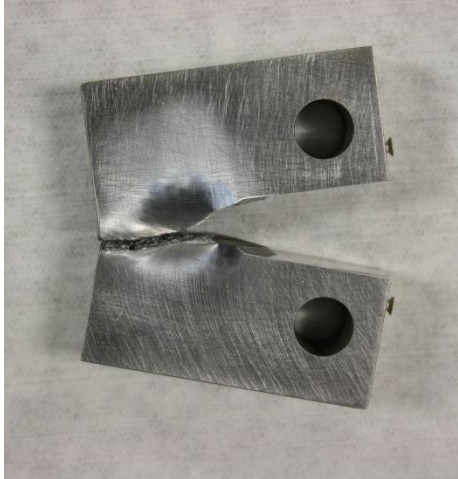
Plane Strain Fracture Toughness Specimen Drawing
